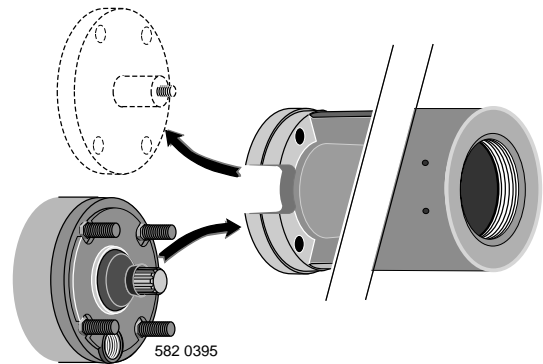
Remove fixture and mount pump on motor for thrust bearing setting.
